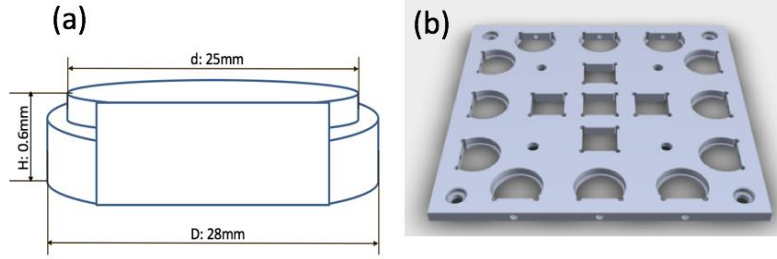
Schematic diagram of (a) Ti6Al4V-xB alloy button; (b) button holder in the EOS M290 machine
